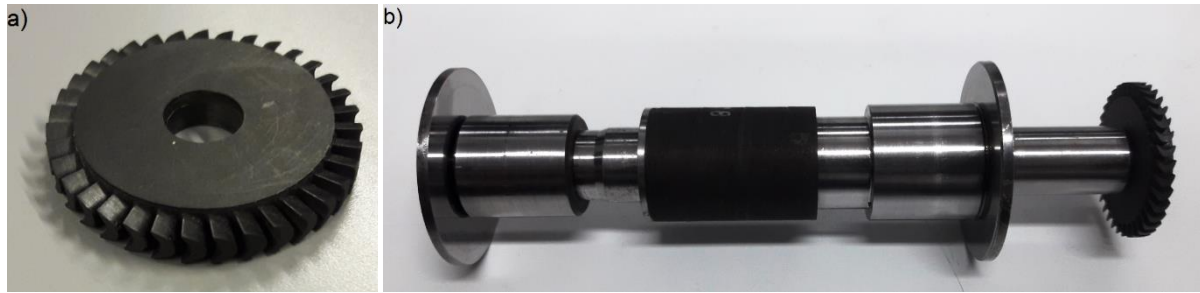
Rotor disc made of the PEEK-type plastic (a) and the complete turbogenerator rotor on which the rotor disc is mounted (b)
